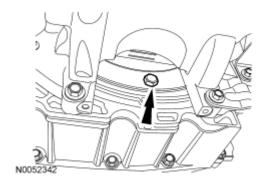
Locating Torque Converter Bolts Courtesy of FORD MOTOR CO.
